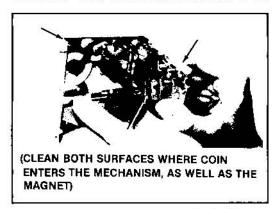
Surfaces to Clean Inside the Coin Mechanism
